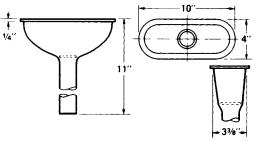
Plain End Outlet 3- by 9-in. Oval
